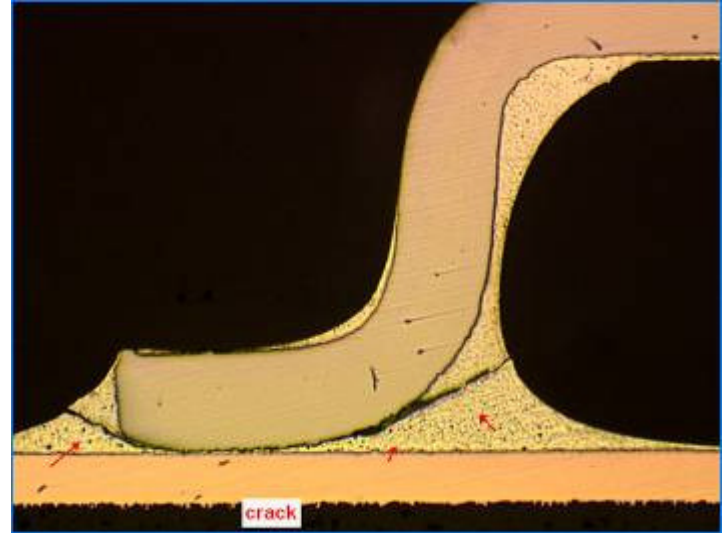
cross section, SN65, U62, left lead and solder crack, 100x
